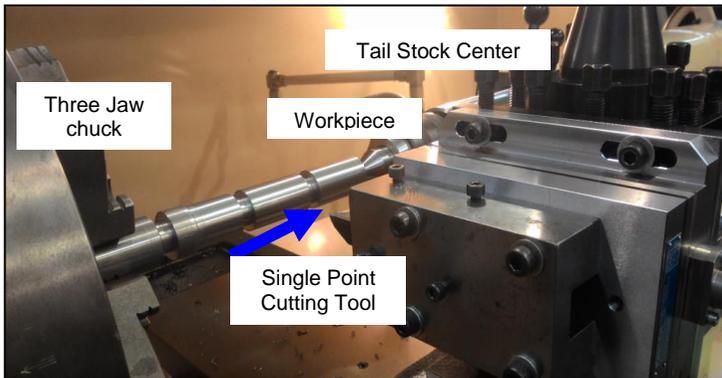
Experimental setup: Cutting tool-work piece-clamping.
